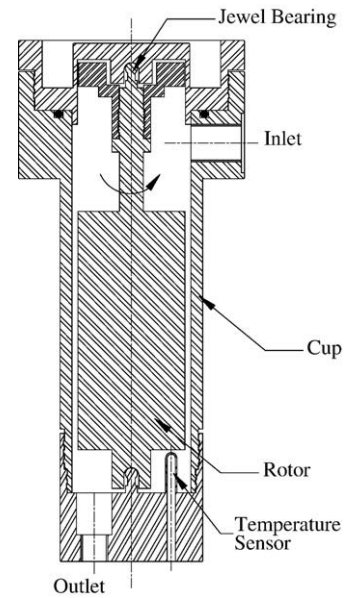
Cup-rotor assembly of a flow-through viscometer.
